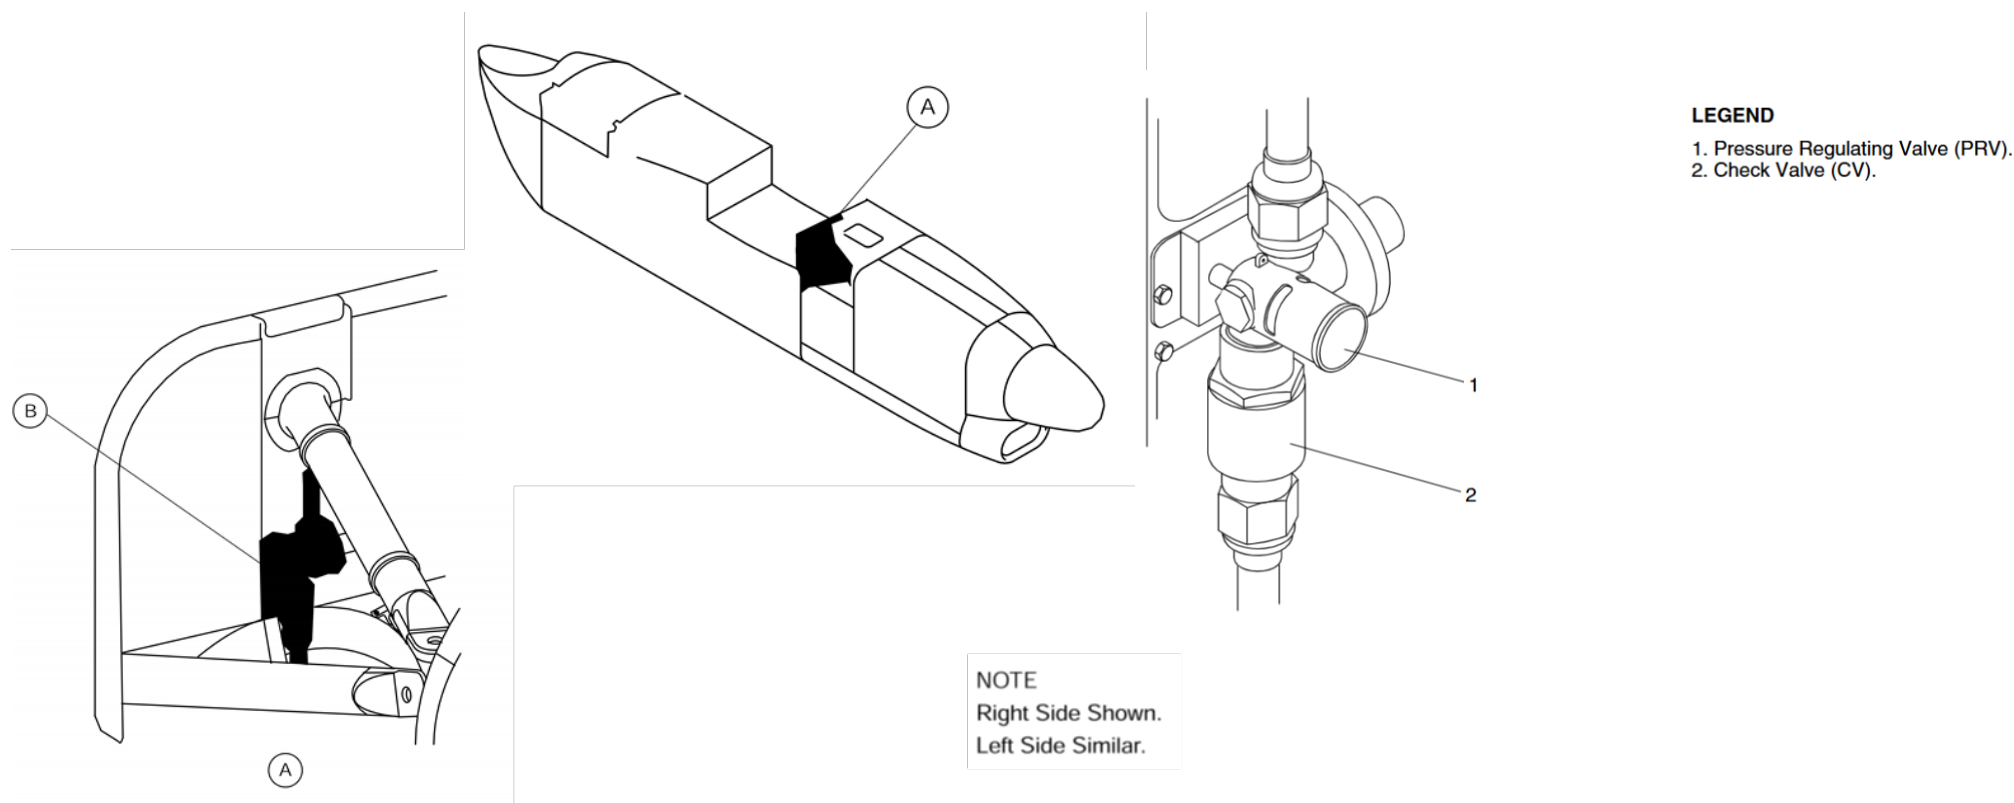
Pressure regulating and relief valve & Non-Heated Check Valve – Location
